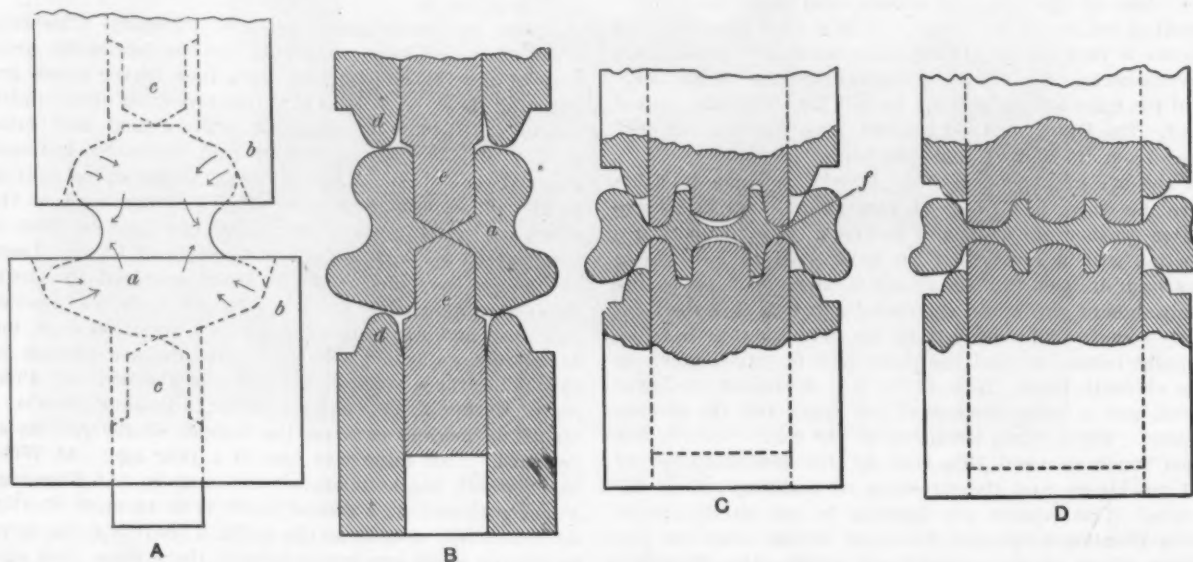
The Four Steps in the Working of the Blank in the Forging Press.
